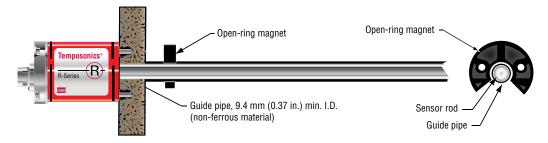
Installation example using non-ferrous guide pipe (customer supplied).
